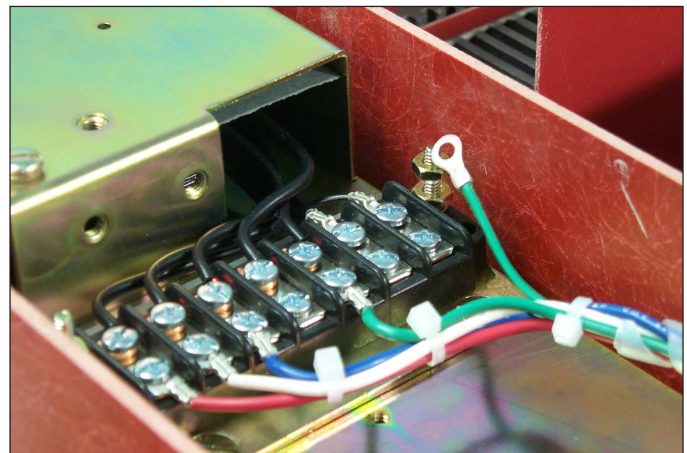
Sensor Harness Connected to the Aux. CT Module Terminal Block.
